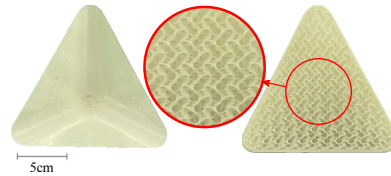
Top (Left) and bottom (Right) view of 3D printed pyramid, with a close-up view of the gyroid infill pattern.
